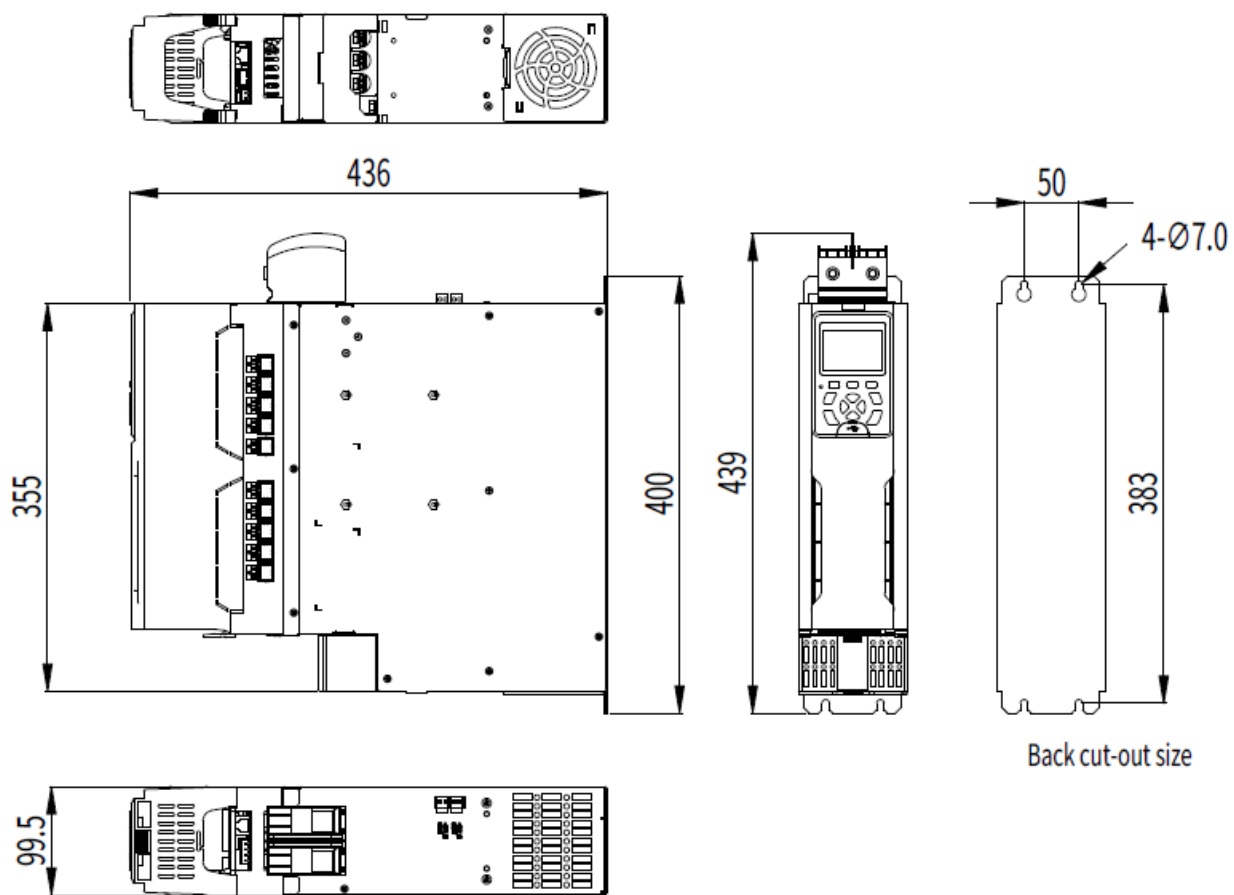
0149–0183 rectifier unit dimensions (unit: mm)
